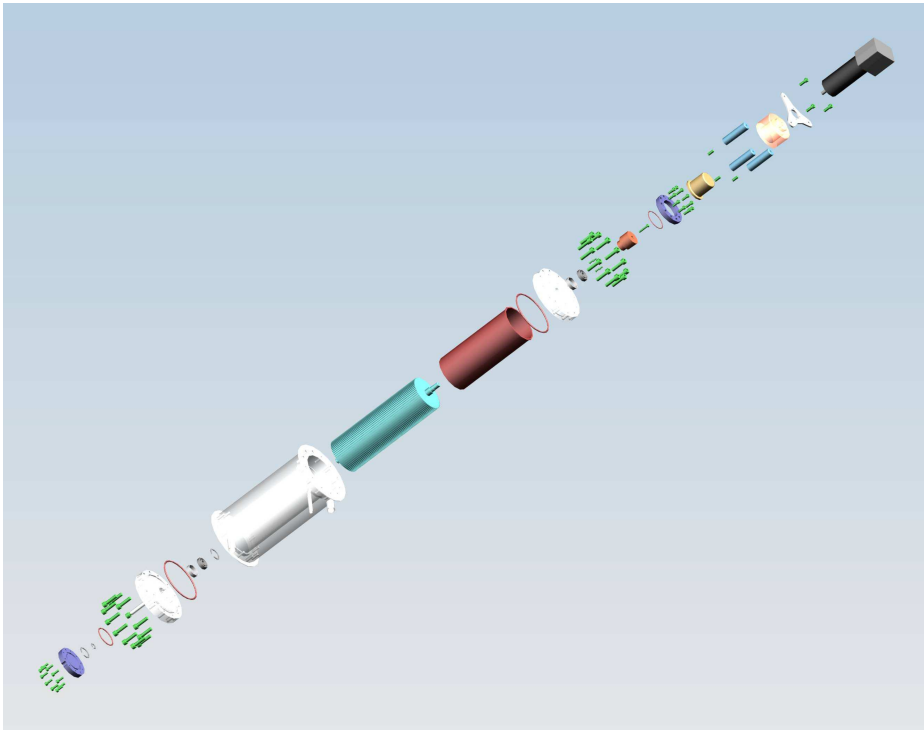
Exploded view construction drawing of the 60 nm³/h RPS prototype.
